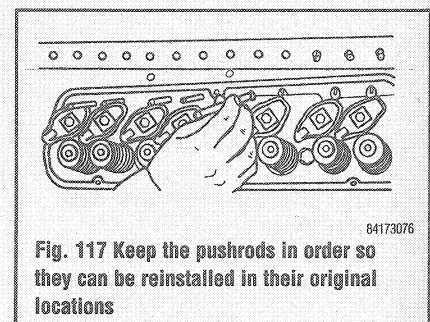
Keep the pushrods in order so they can be reinstalled in their original locations
